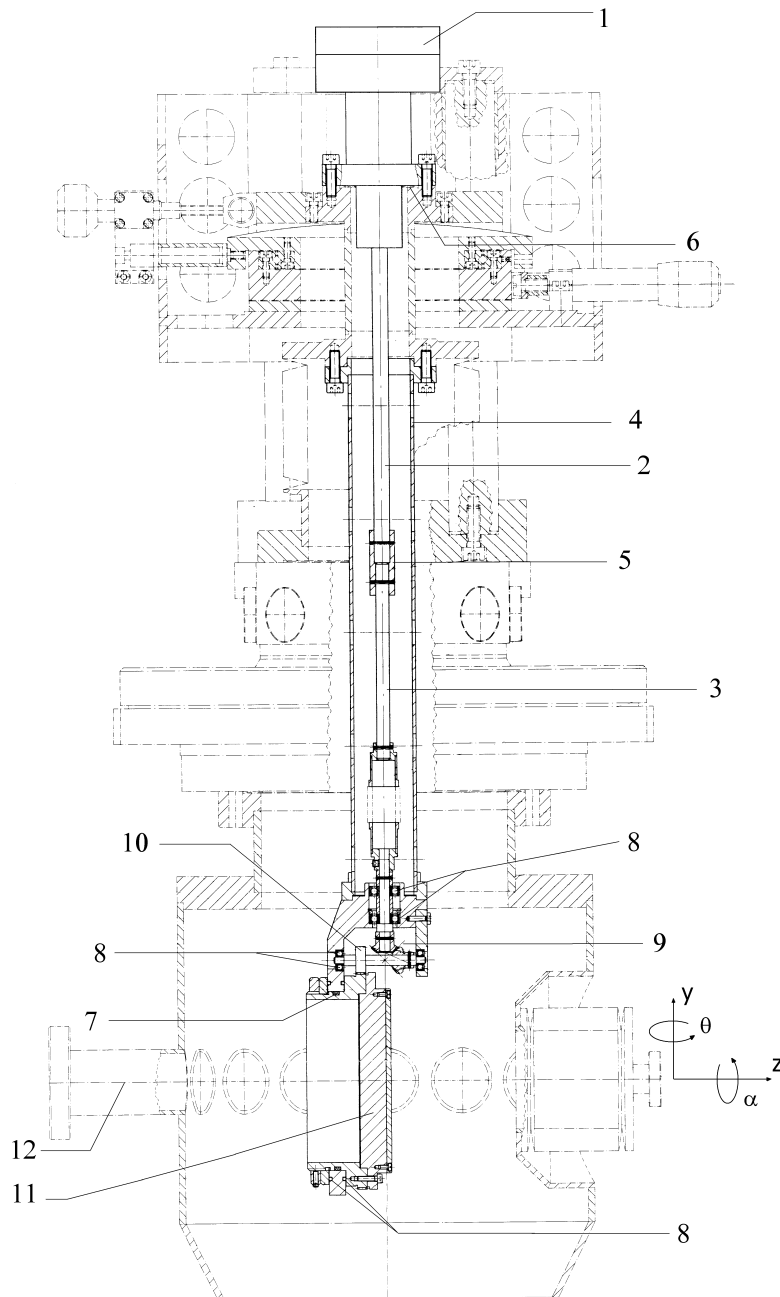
The scheme of the manipulator with azimuthal movement showed in detail. (1) Manual turning knob for azimuthal rotation. (2) Rotary feedthrough. (3) Shaft. (4) Connection tube. (5) U-joint. (6) CF-sealing. (7) O-ring. (8) Ball bearings. (9) Bevel gears. (10) Pinion gear. (11) Target holder. (12) Beam line.
